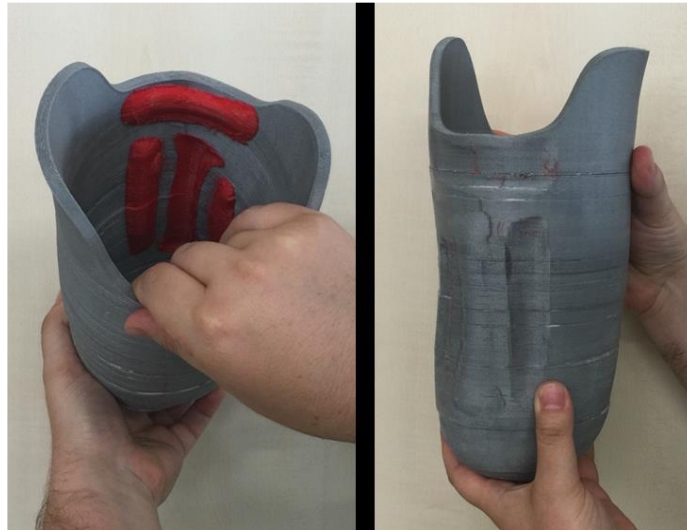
(a) The shell structure to be printed with hard material and (b) the critical zones with soft material.
